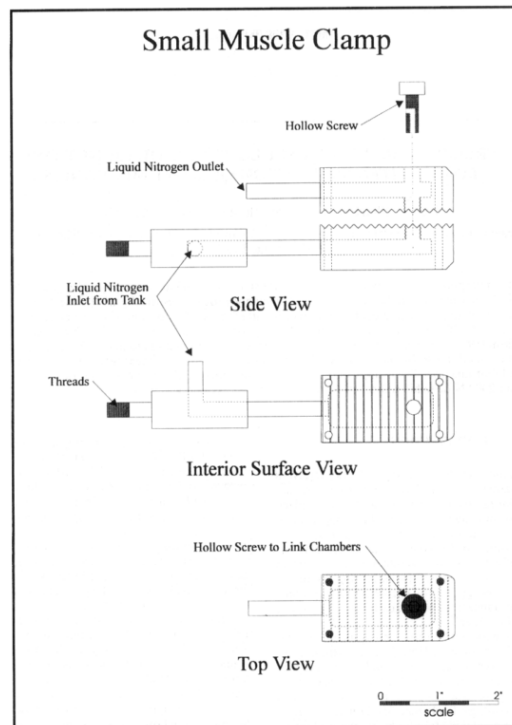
Example freeze clamp design for circulating coolant and rapidly chilling clamped portion of specimen [31].
